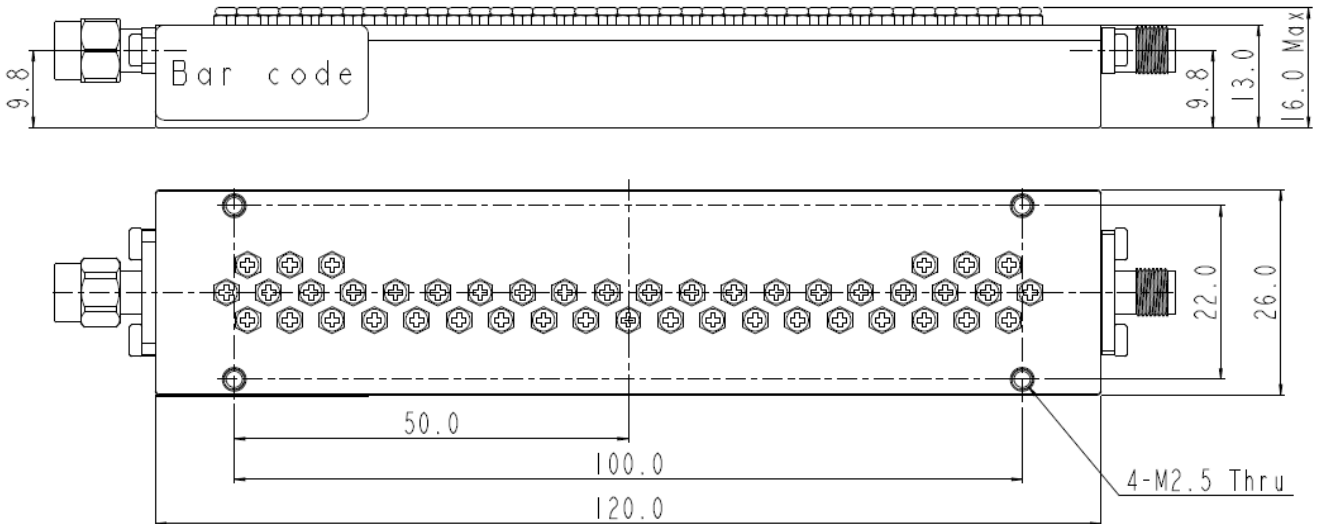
JX-CF1-4.6G8.5G-30S1 front panel layout
